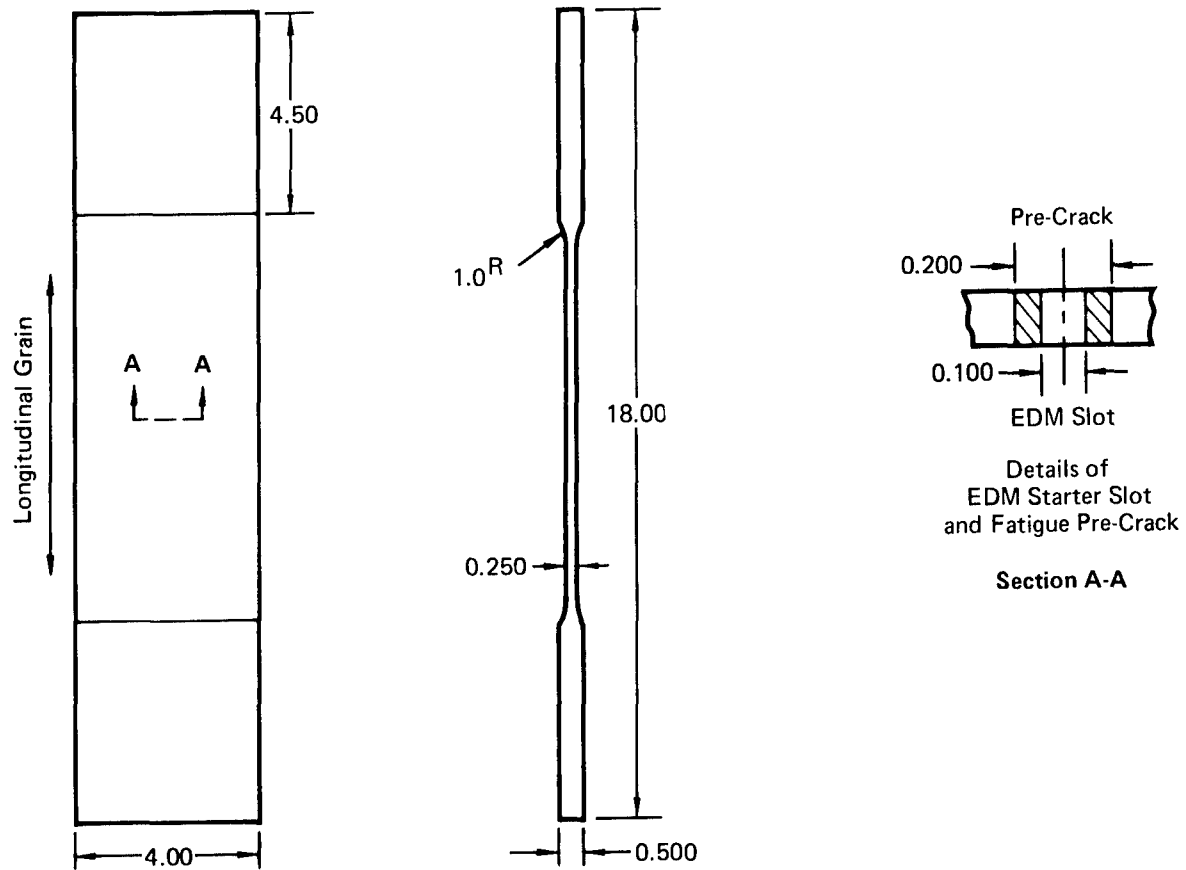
STARTER CRACK DETAILS - OPEN HOLE SPECIMEN
